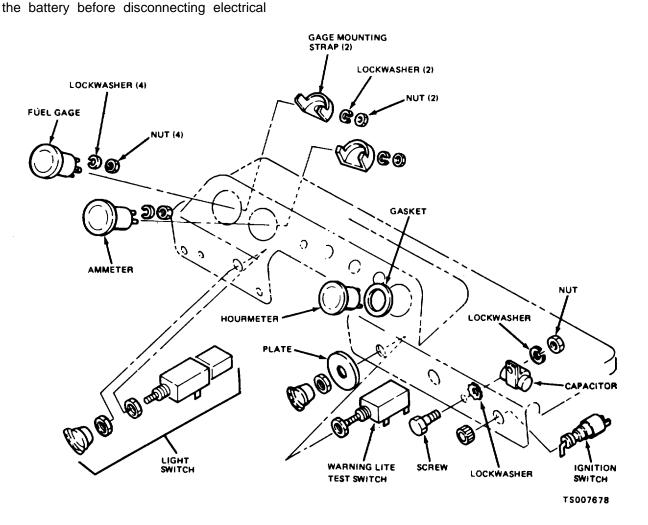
Instrument Panel, Disassembly and Reassembly
